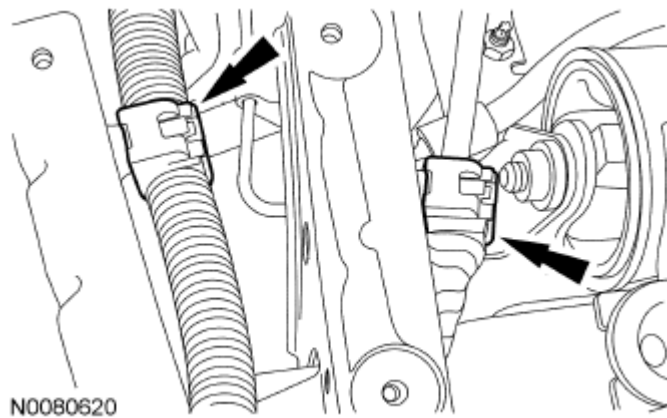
Locating Wiring Harness Retainers On Battery Tray Bracket
